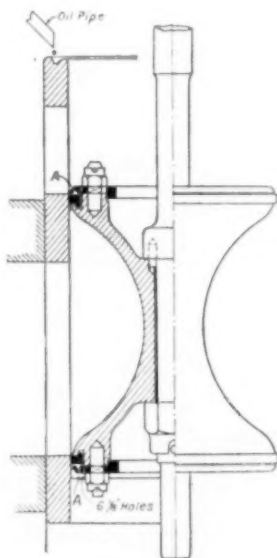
PISTON-TYPE DROP VALVE FOR STEAM ENGINES
